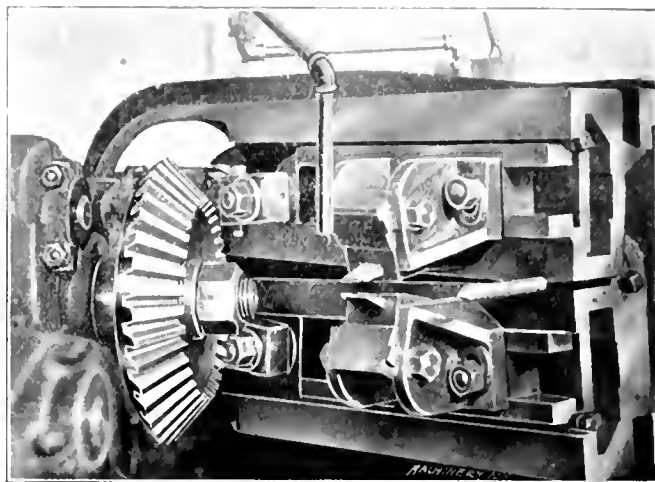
Detail of the Browning Machine, showing Two Tool-holders.
